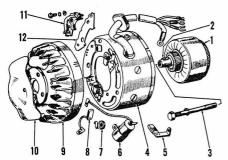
Exploded view of starter-generator unit used on deluxe models.
